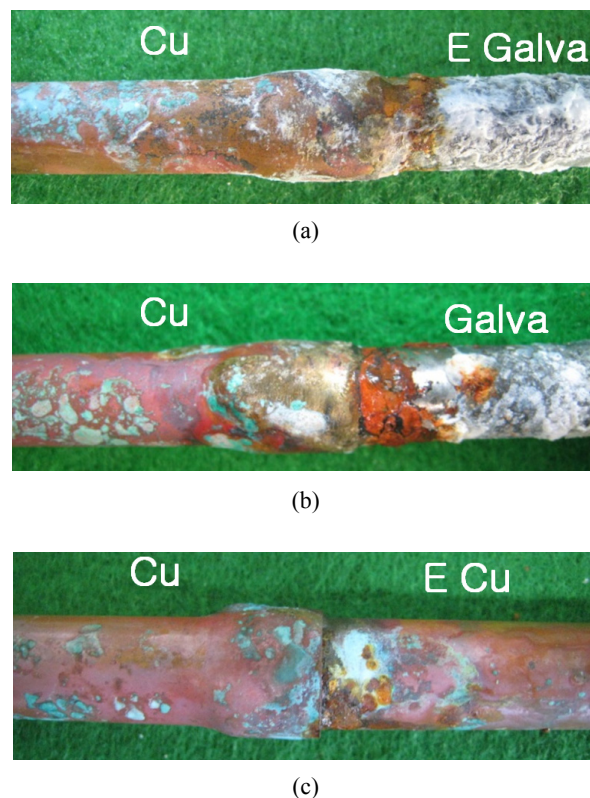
Appearance of (a) Cu-E Cu, (b) Cu-Galva, and (c) Cu-E Cu joints, brazed using filler metals, after cyclic corrosion tests for 10 cycles. Cu-30 % Ag filler was used for (a) and (b), and Cu-10%Ag filler was for (c).
